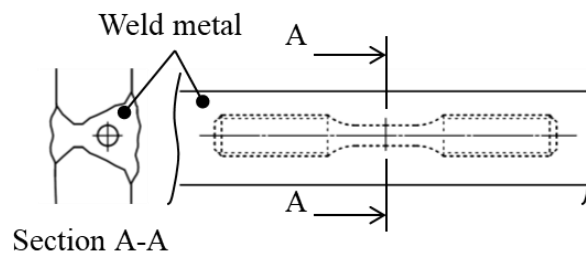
Schematic drawing of specimen sampling for the weld metal.
